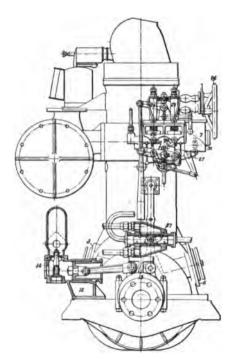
Beardmore 200 B H.P. Oil Engine.
